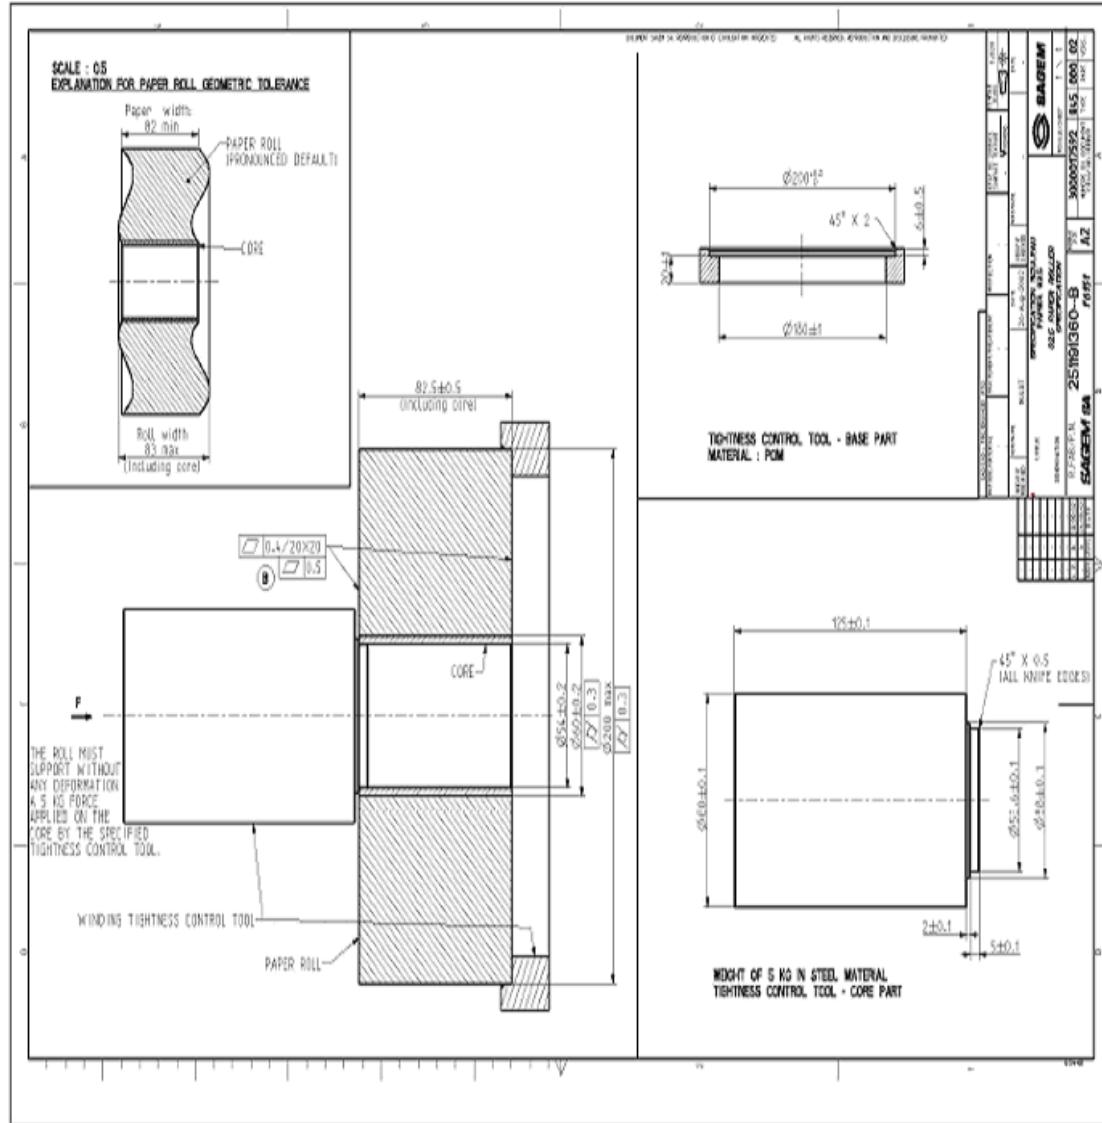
Printer Paper Roll Dimensions and Tolerances
